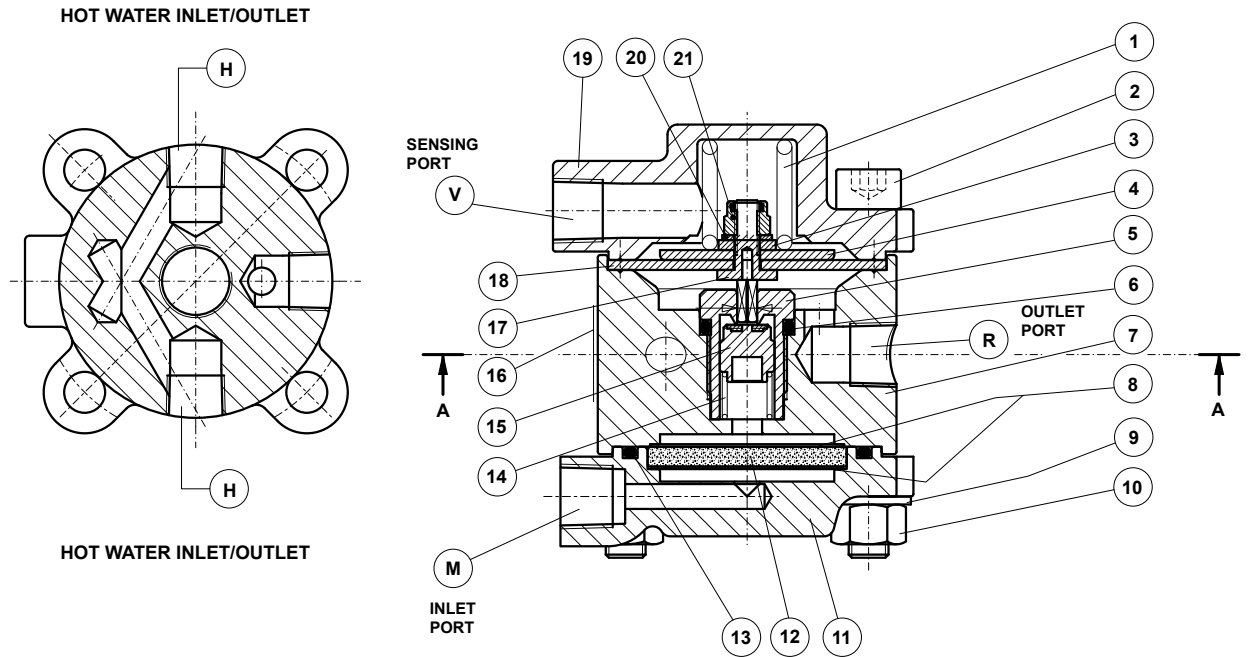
Type SA/2 Pilot Supply Filter Assembly
